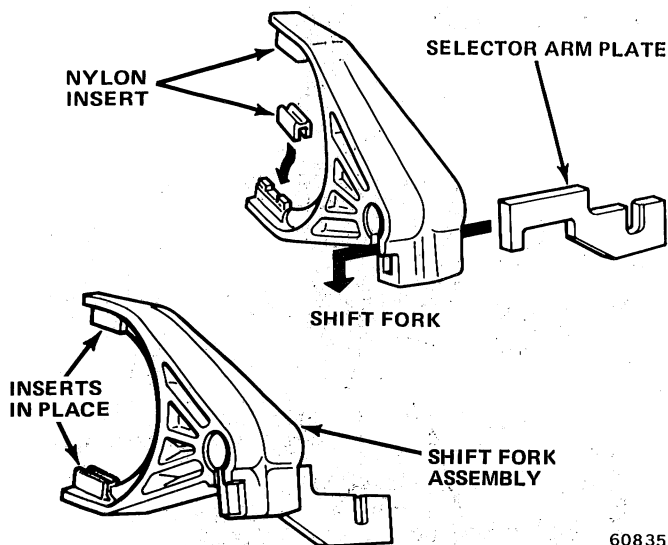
B-28 Assembling Shift Forks and Selector Arm Plates
